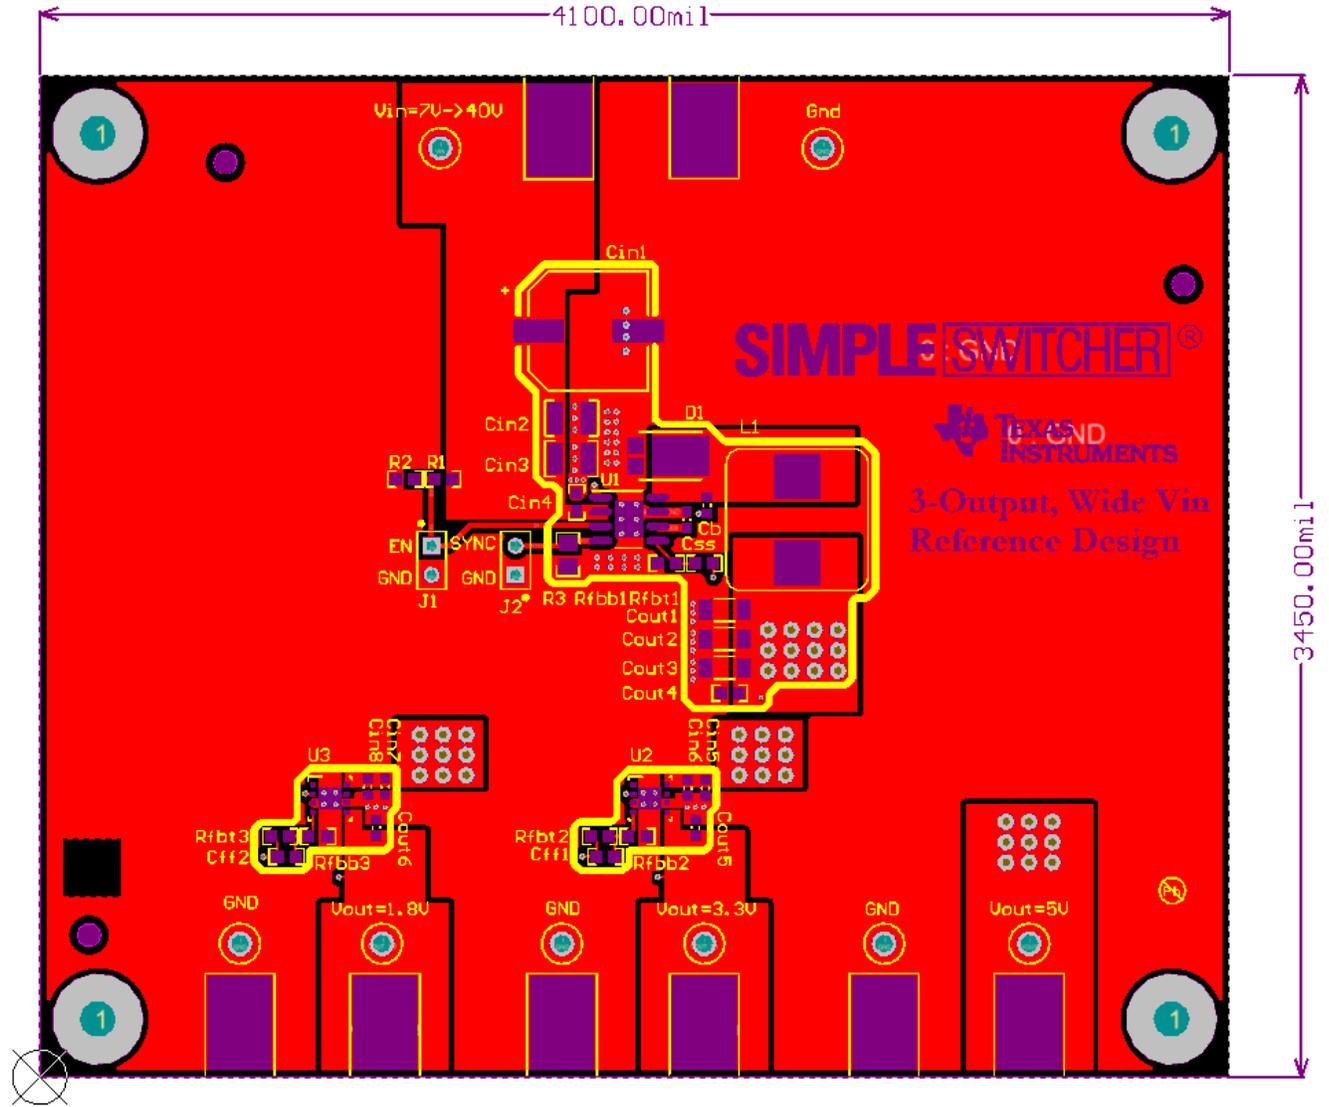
Top Layer Copper with Top Overlay and Top Solder
